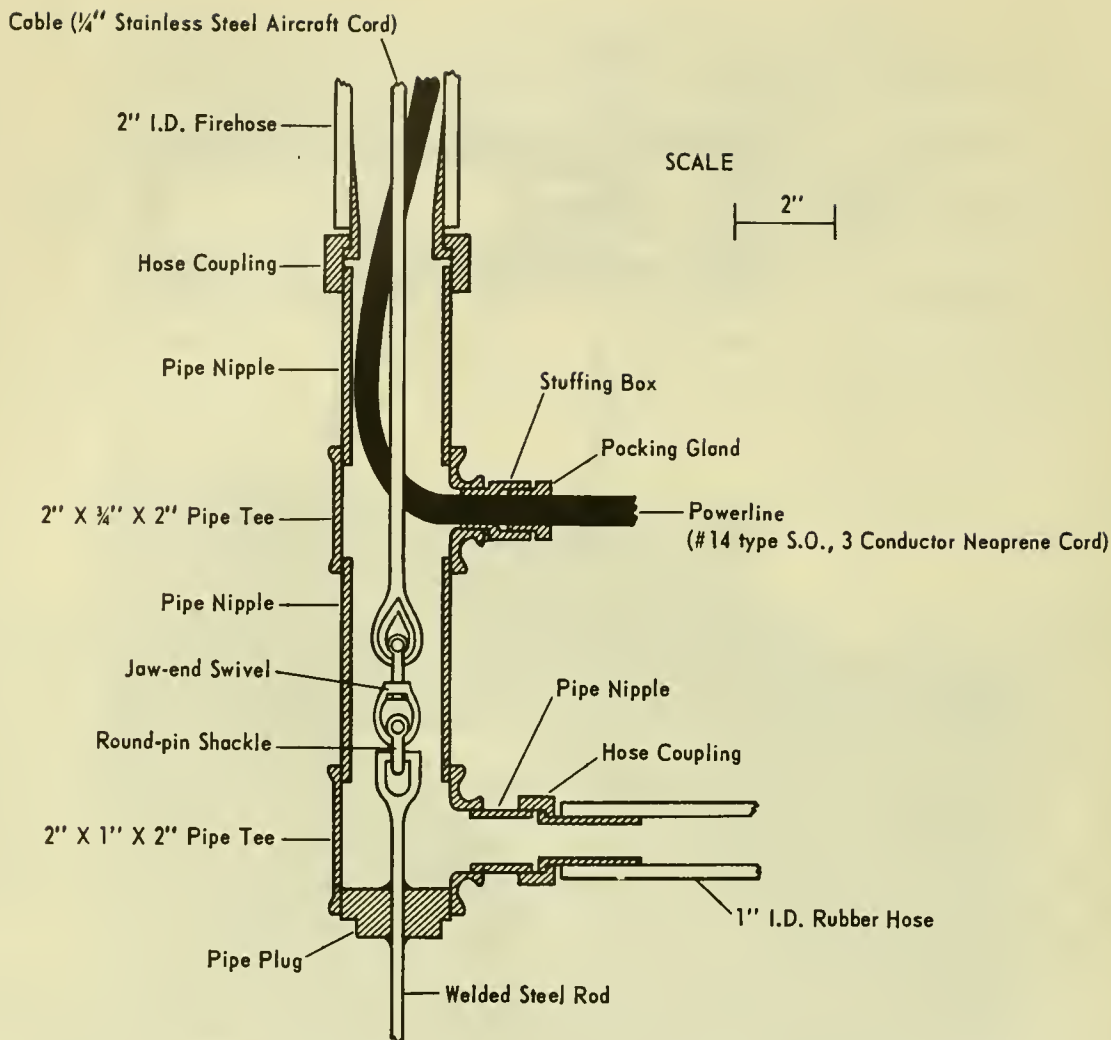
Schematic drawing of the lower hose-cable terminal assembly. Pipe threads are not indicated.
